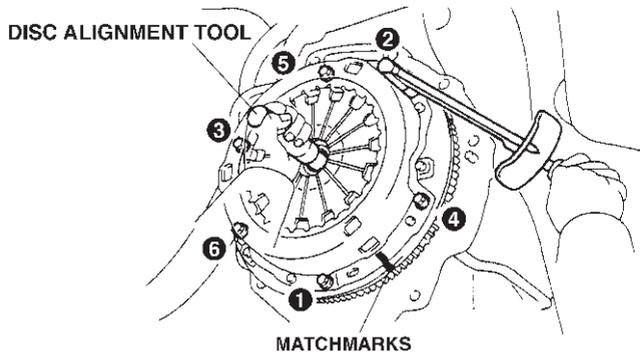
With the disc held centered, the pressure plate bolts should be tightened two turns at a time in a pattern like this. (Courtesy of Toyota Motor Sales USA, Inc.)
